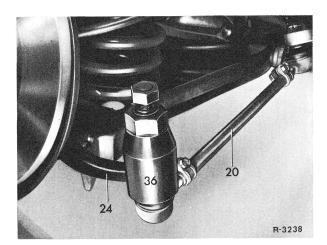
Track rod36 Puller24 Steering knuckle arm
